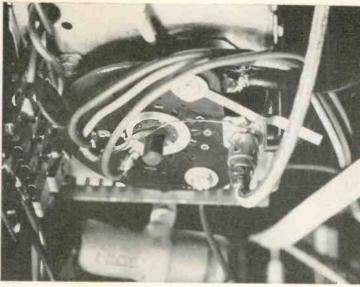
Switch assembly is fastened to the rear of the VHF tuner by self-tapping screws. The VHF tuner's i-f link cable is removed and inserted into the wafer switch jack, as shown.
